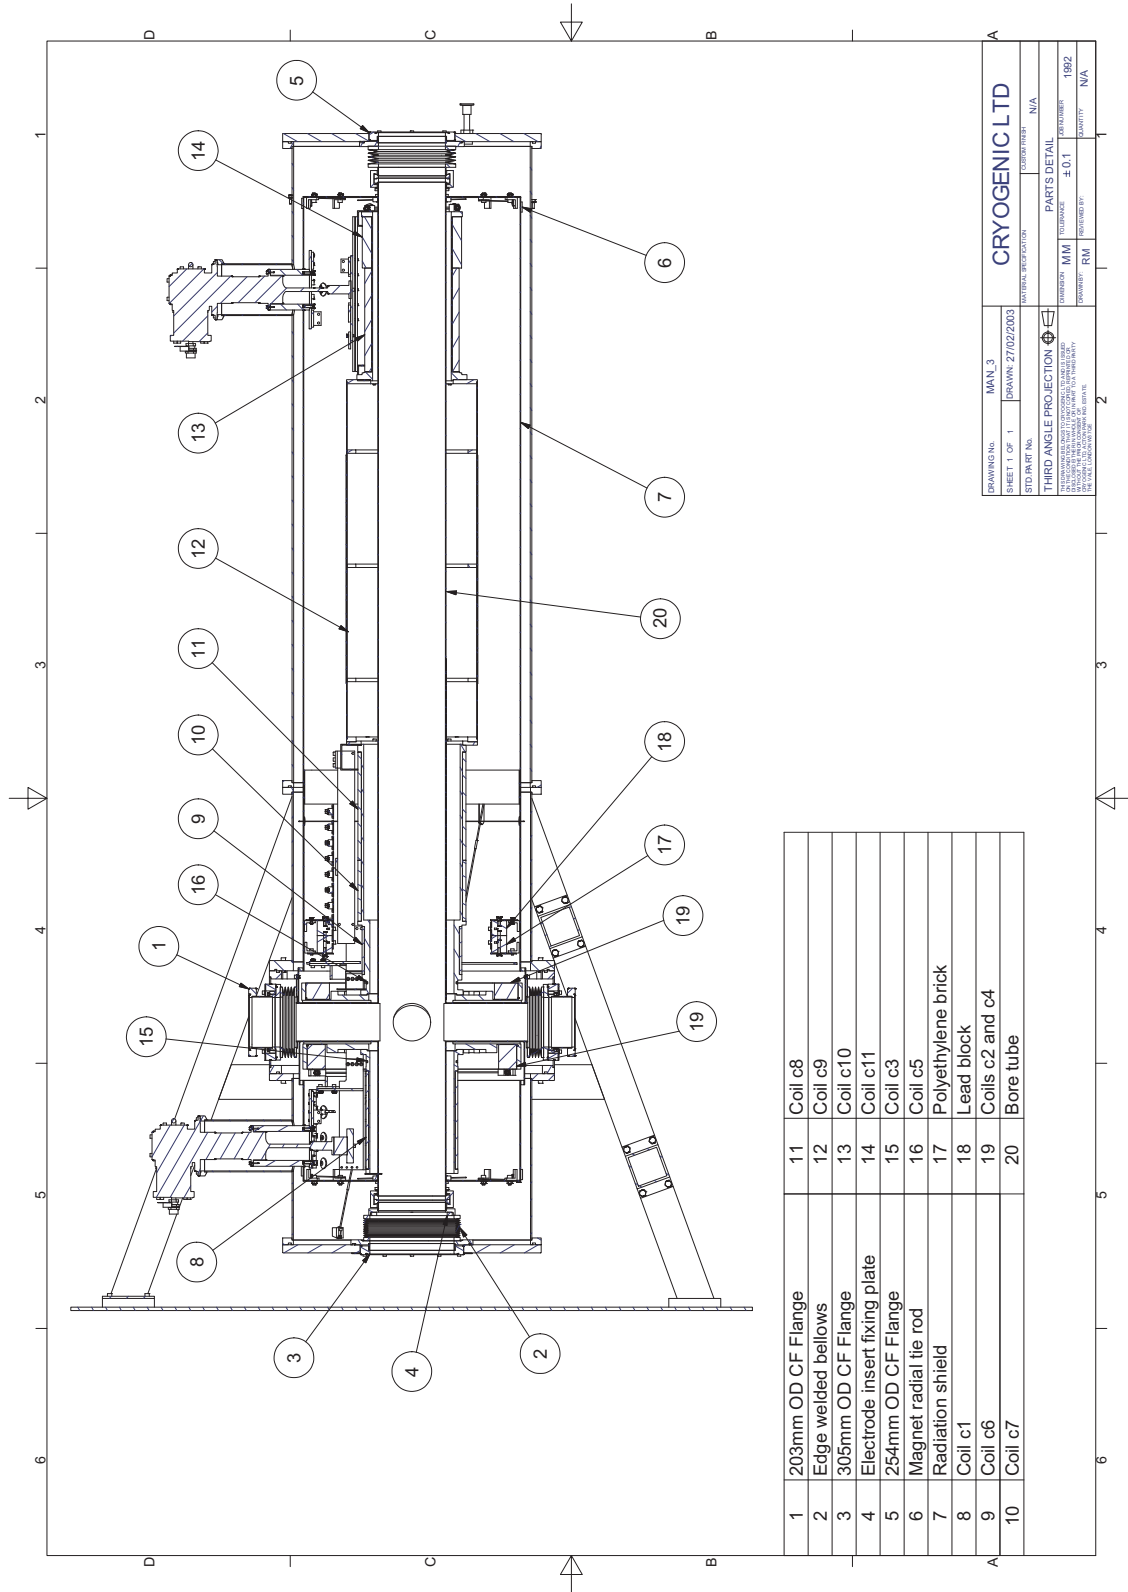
Technical drawing of the system assembly. The coils are indicated and named according to the scheme shown on figure 4.14.
